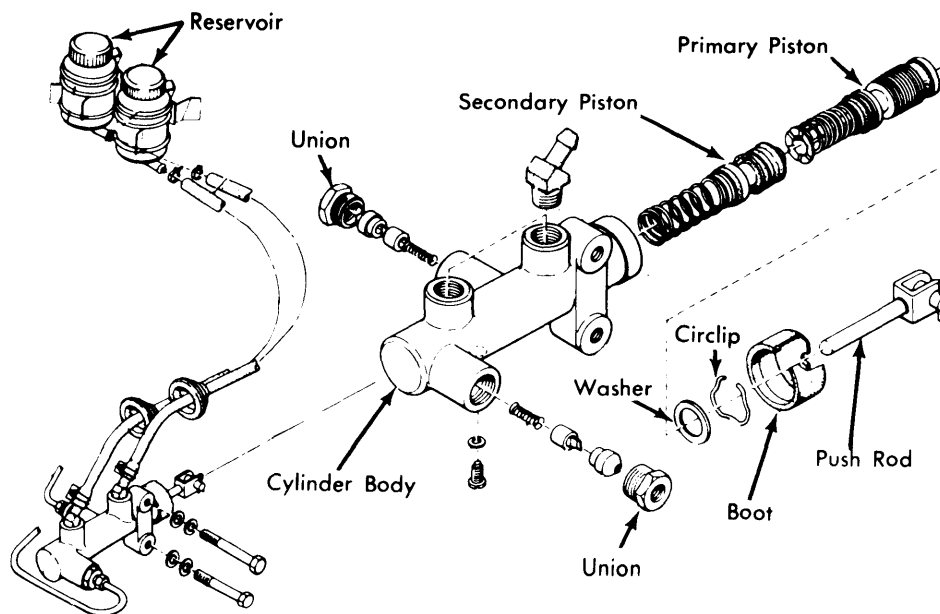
Exploded View of Components in Tandem Master Cylinder
